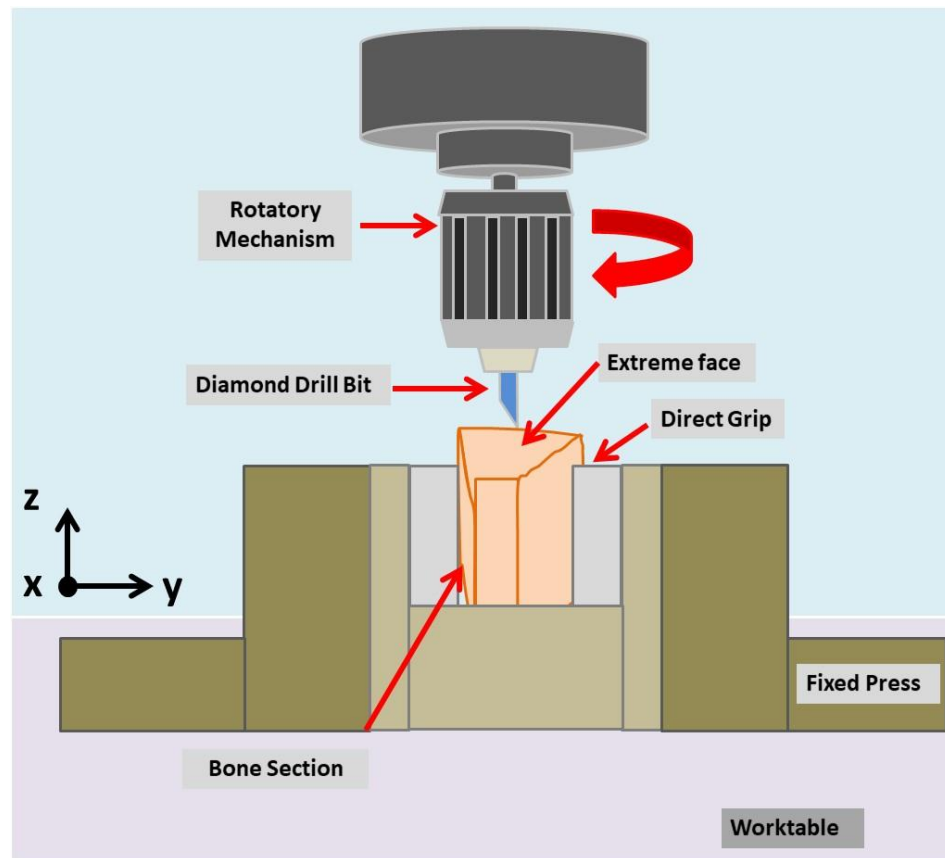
Extreme faces grinding of the bone sections. The samples are aligned to z axis and directly gripped to the fixed press mechanism.
